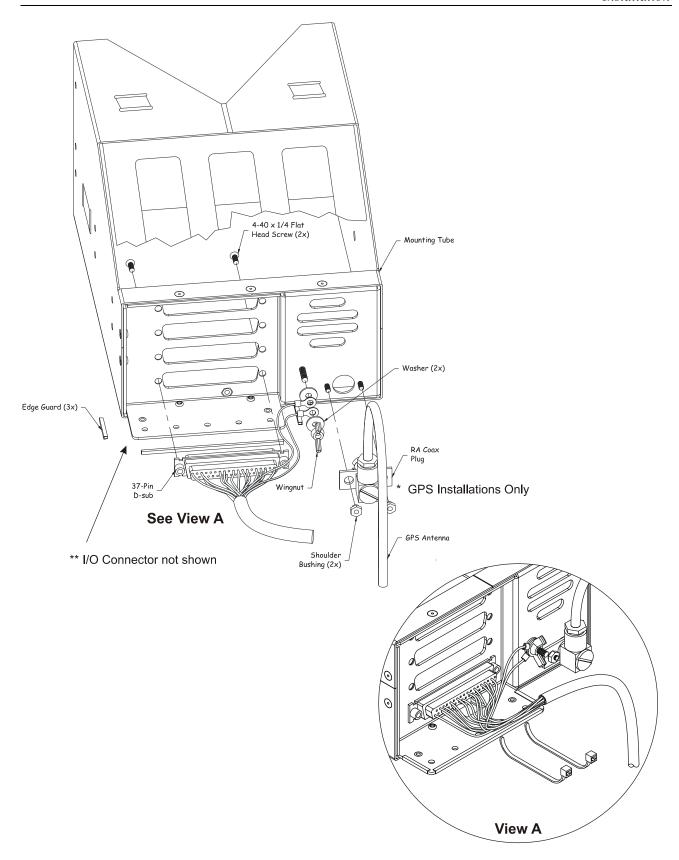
MX20 Typical Rear Panel Wiring Connections
